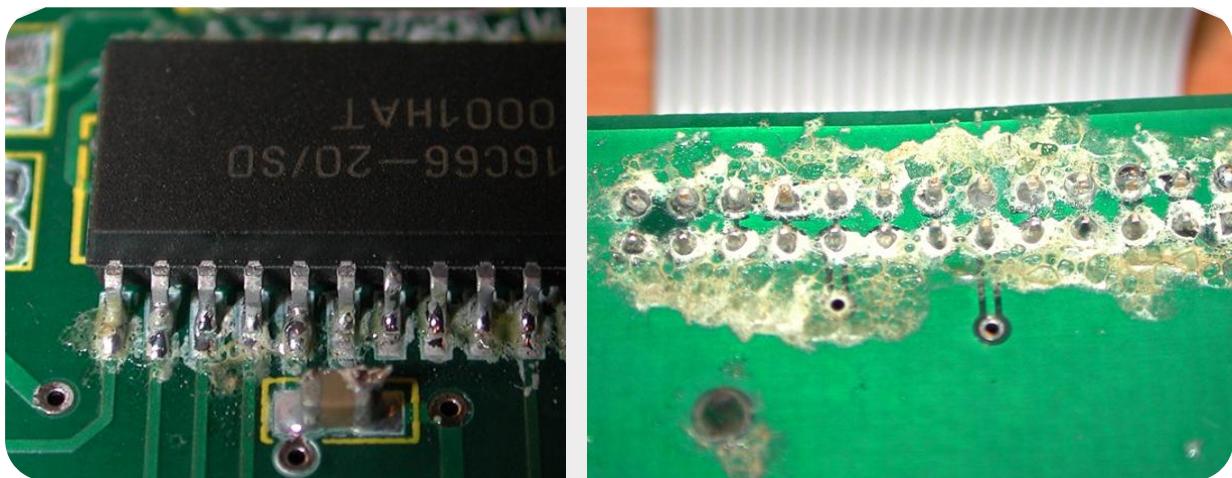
Corrosion on a printed circuit board after two days of humidity testing.
